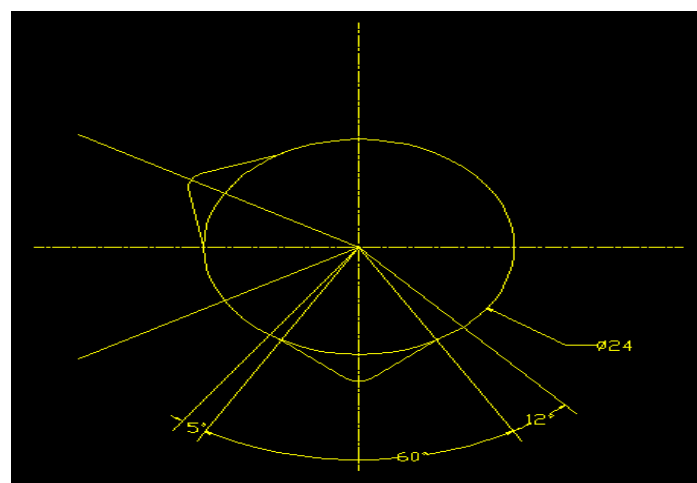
Cam Profile for First Cylinder Exhaust Valve
